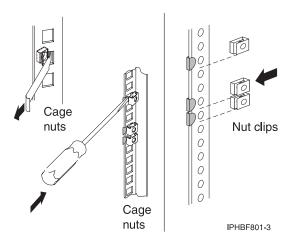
Attaching the cage nuts or nut clips to the rack rails.
